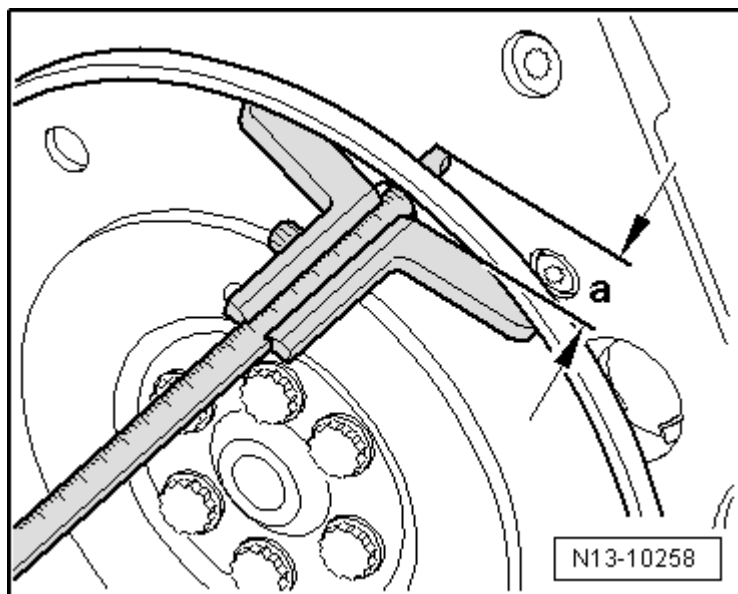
Checking Dimension Three Points And Calculate Mean Value
